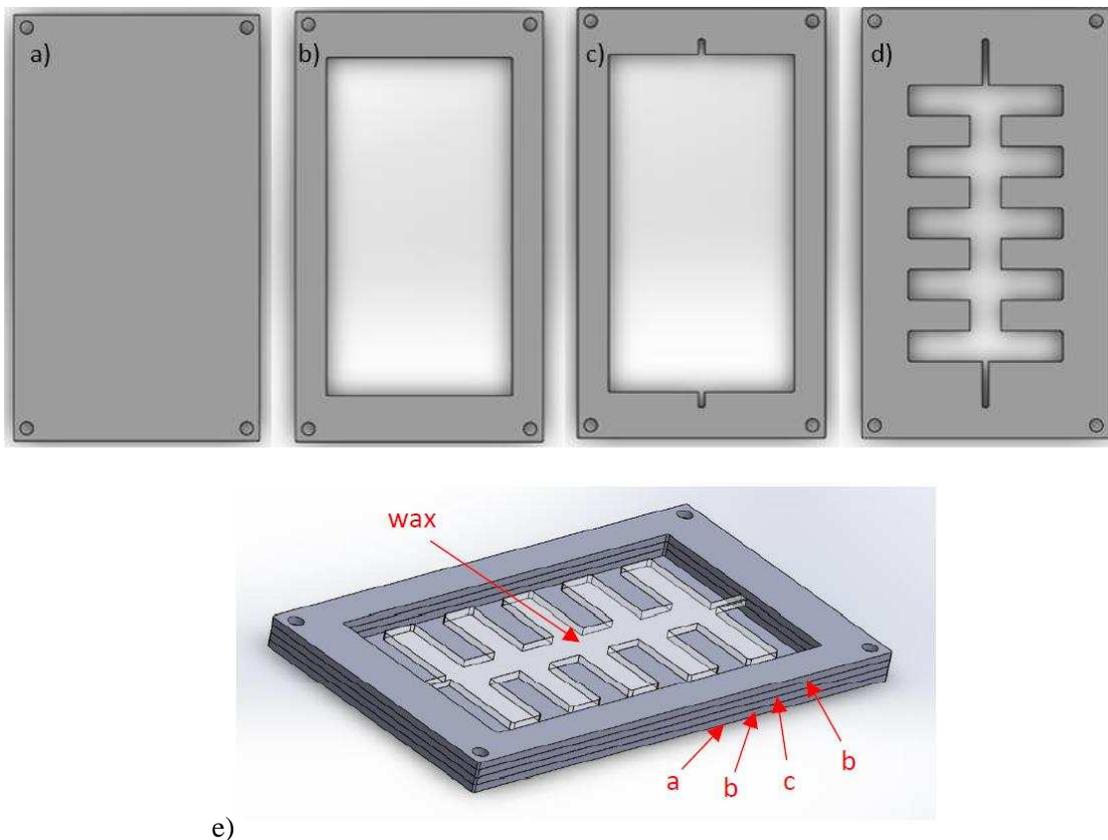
Mould layers for casting: a) Base layer; b) Main core layer; c) Wax core layer; d) Wax mould, e) 3D view of the assemblage.
